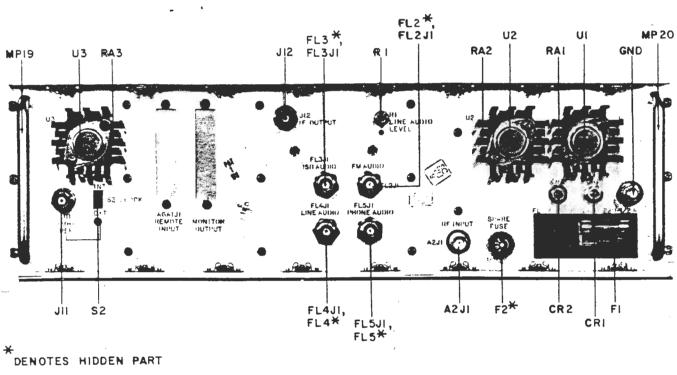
WJ-8716 Main Chassis Rear Panel View Location of Components
